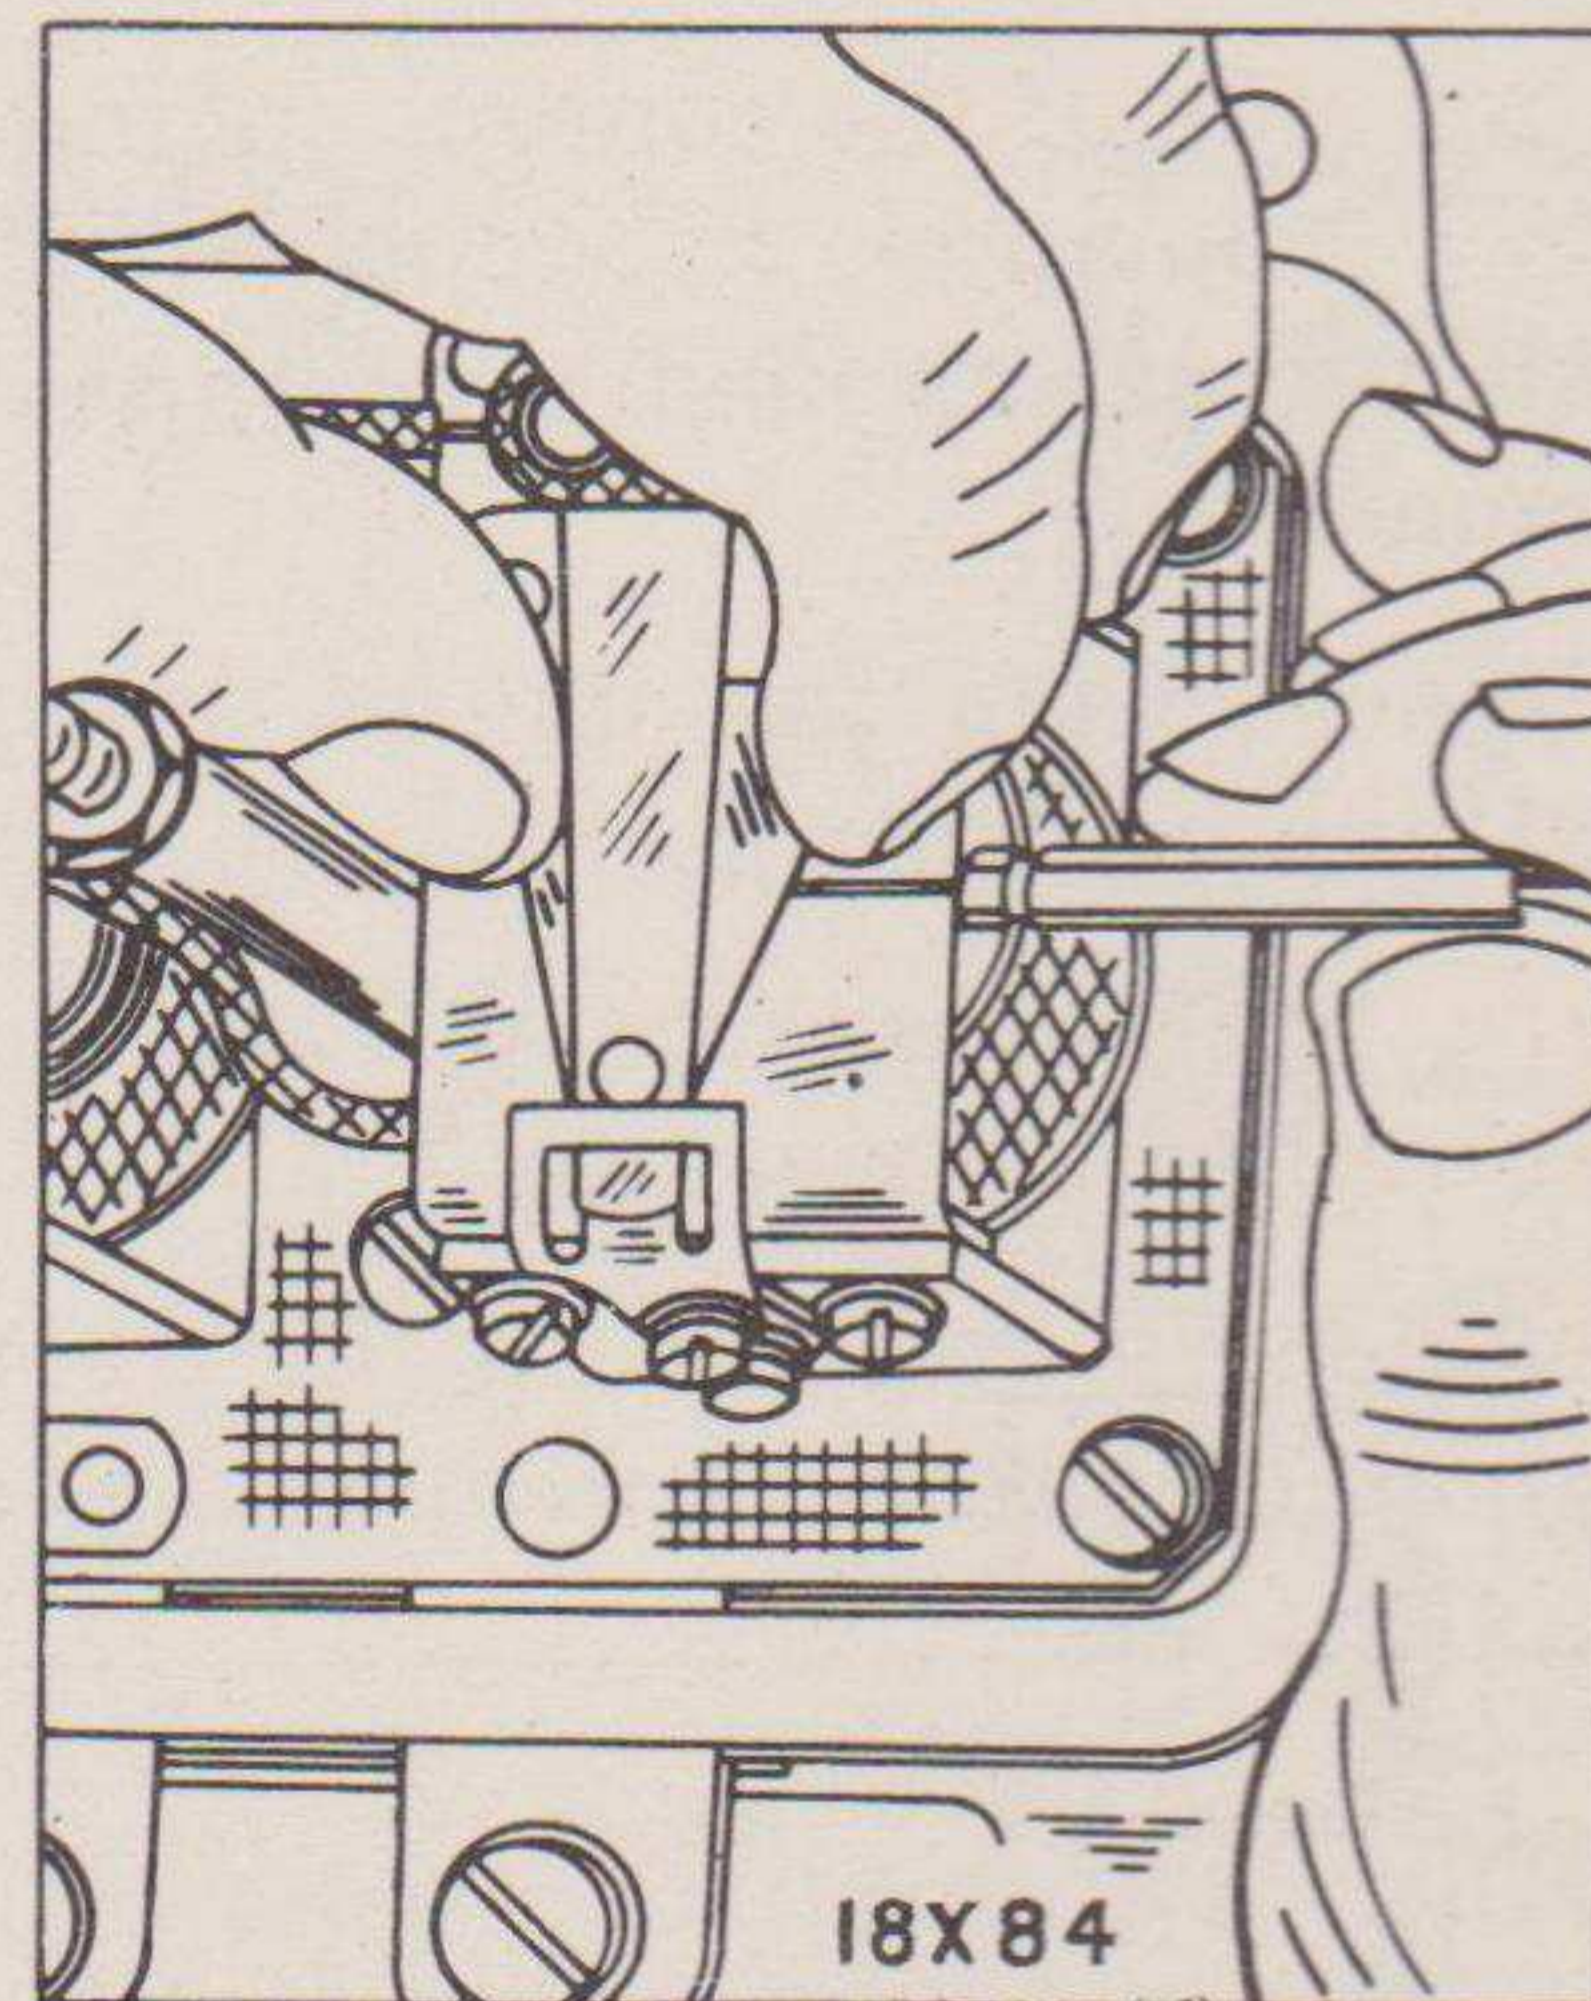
Checking Armature Air Gap with Pin Gauge
